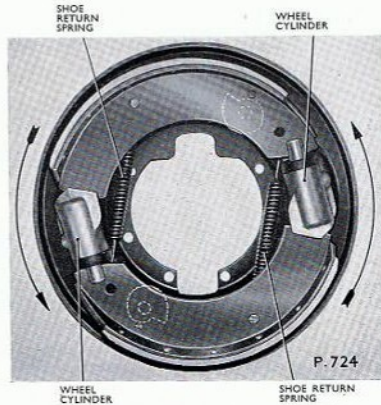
Front view of the left hand (nearside) front brake assembly. Arrows indicate the direction of drum rotation.
